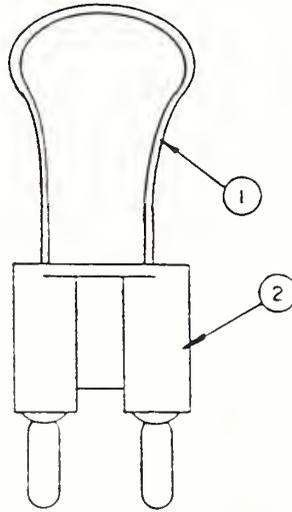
Current Loop, Single Turn, Assembly Drawing
